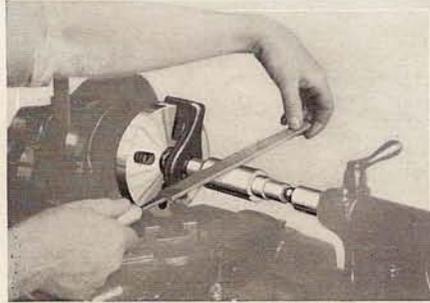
Lathe is Practical for Filing, and Polishing Bushings, Shafts, Parts, etc.
